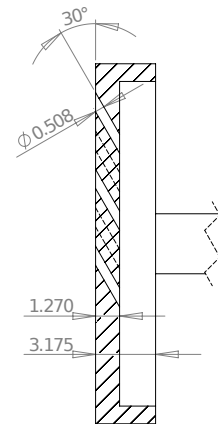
Drawing of one slot row test coupon; freestream flow from bottom to top; dimensions in mm
